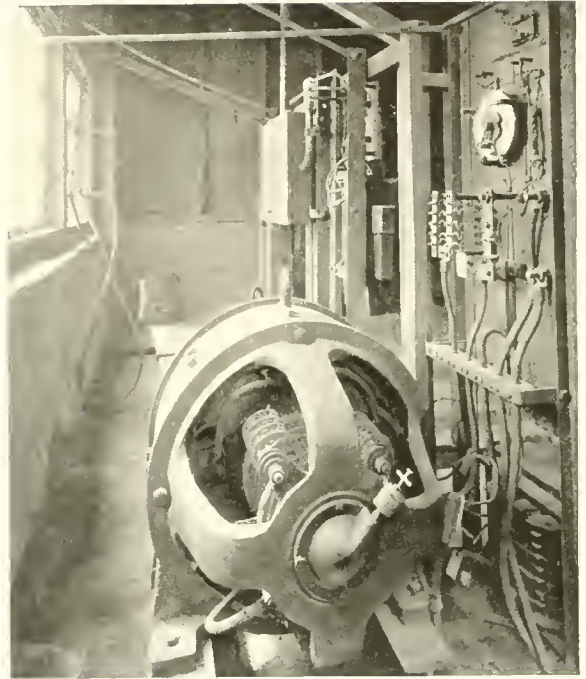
Lincoln Arc Welder 400 ampere capacity installed in the plant of The Standard Steel Castings Co., Cleveland, O. In the background is space provided for the installation of another welder.
